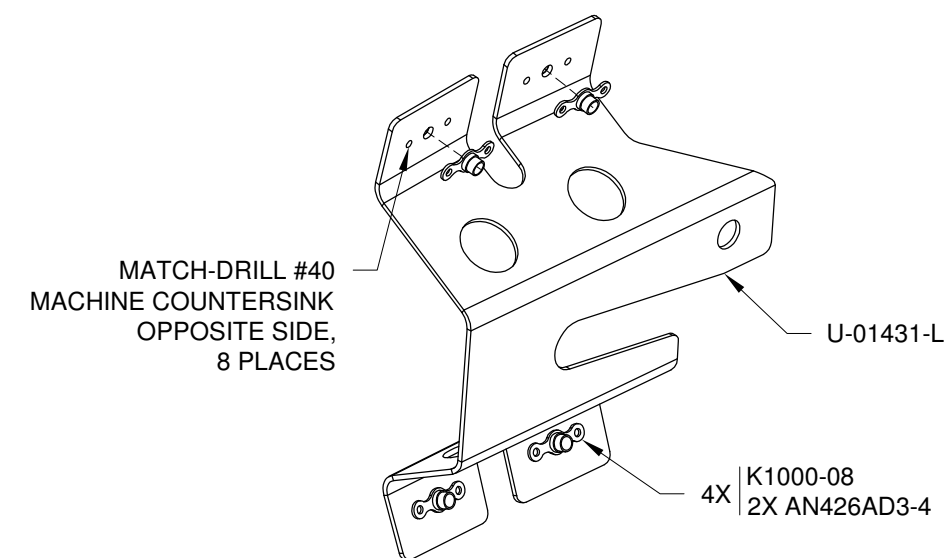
ATTACHING NUTPLATES TO BRACKETS
